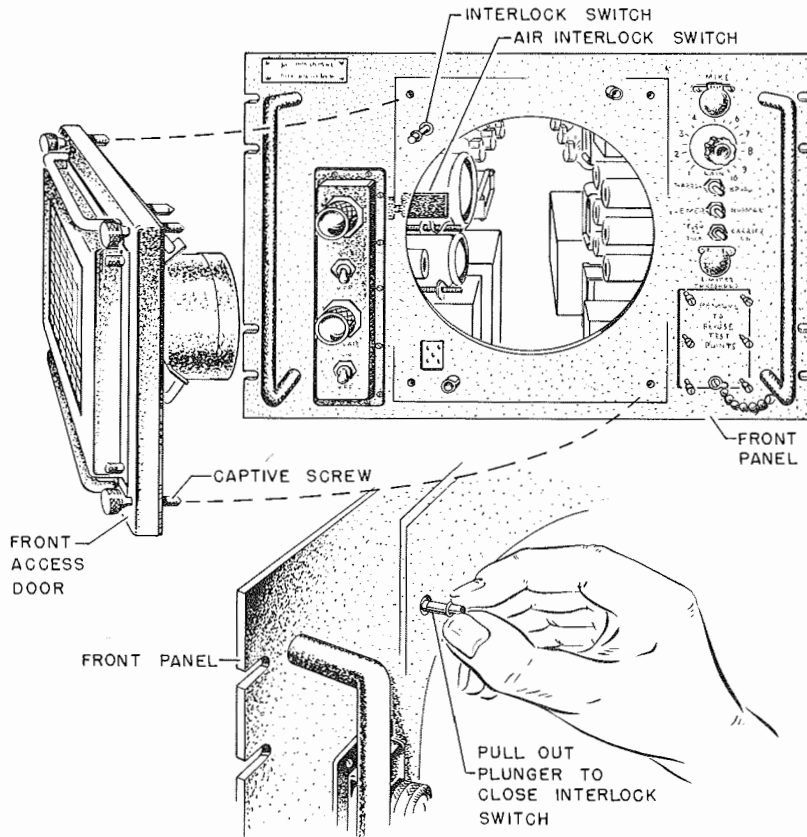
Modulator-Power Supply, Removal of Front Access Door and Emergency Operation of Interlock Switches
